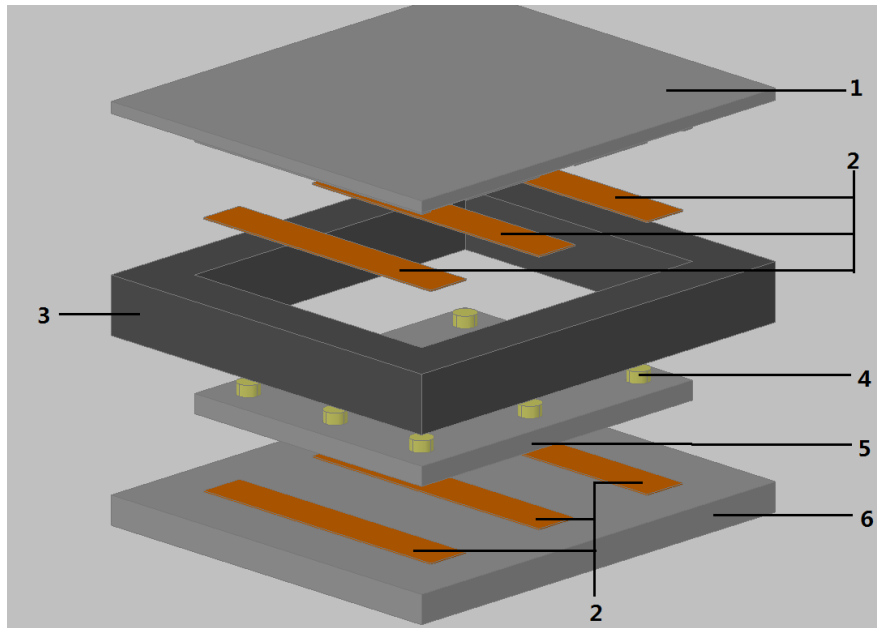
Chart. Three dimensional view of the Assembly Design VII (disassembled).
